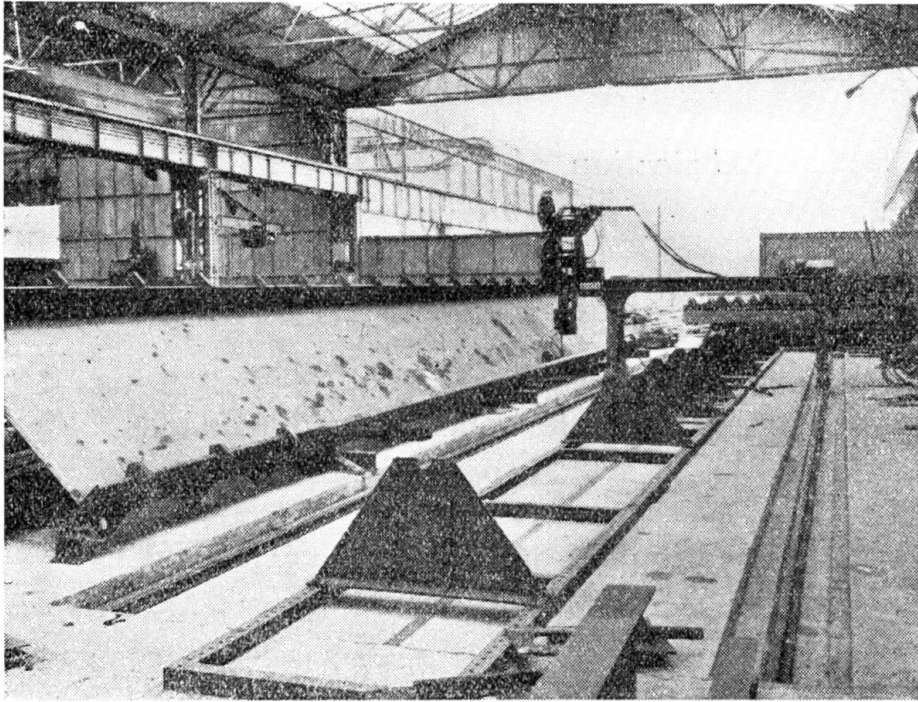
Welding the web to a flange in a Fusarc automatic welding machine. Note long uninterrupted run attained by adding the stiffeners afterwards
